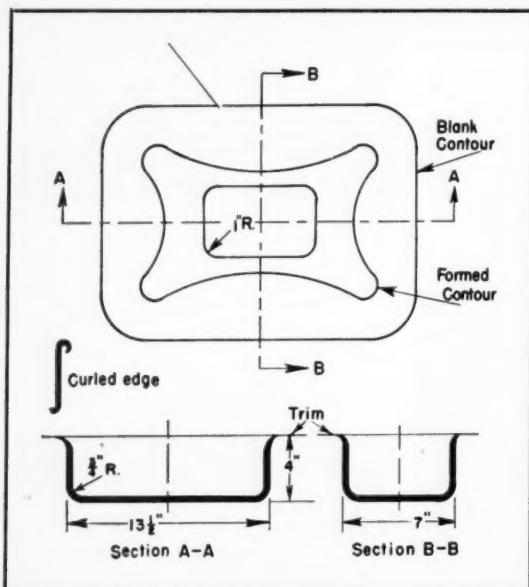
Example of a single-draw rectangular shell. Material is type 302 stainless steel 0.035 inch thick.
